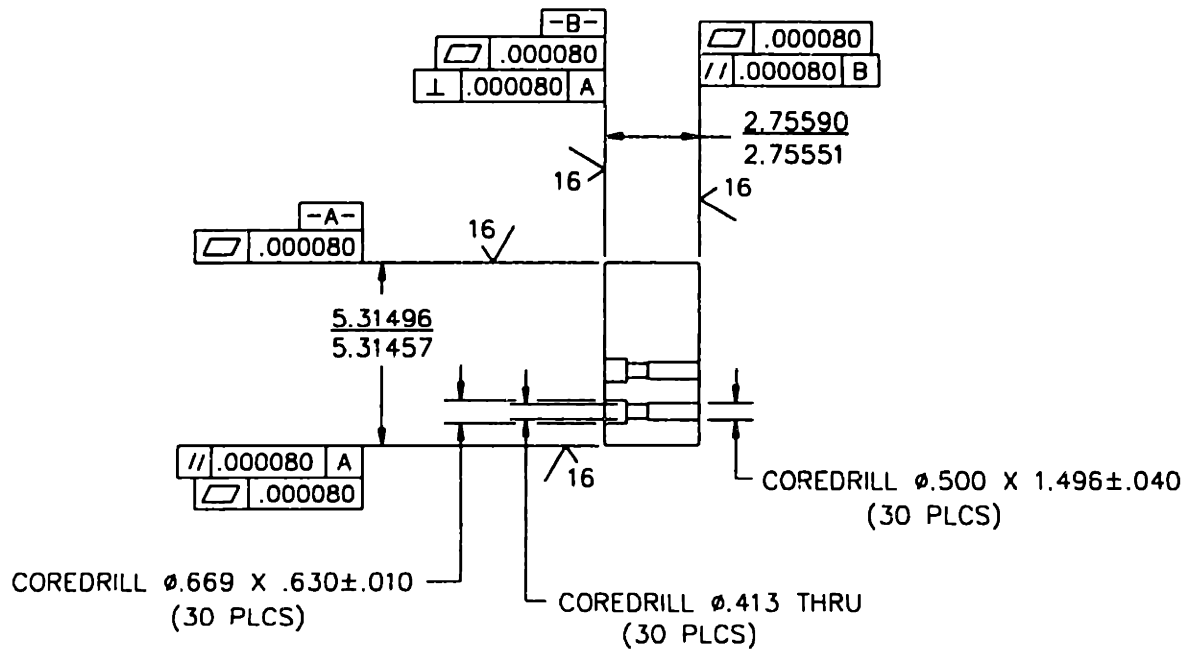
End view (from production drawing) of the rails for the WPGM. The drawing shows the tolerances on a typical rail for hydrostatic bearings.
